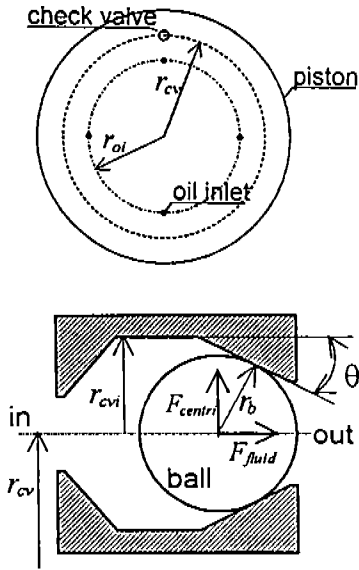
Radius of rotation of oil inlet and check valve and schematic diagram of check valve and check ball
